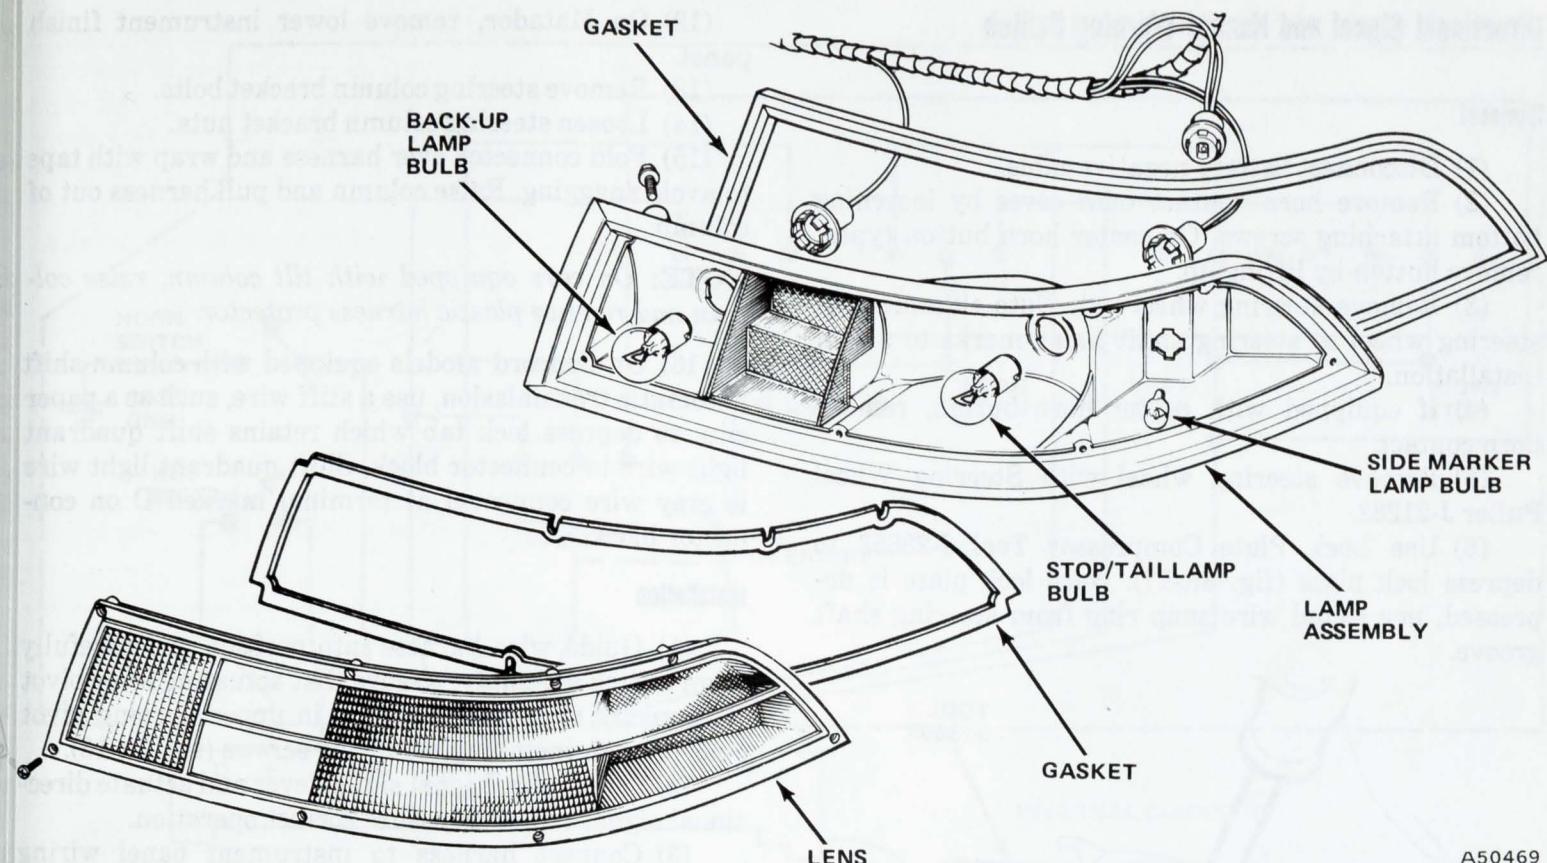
R-15 Rear Lamp Assembly—Pacer Hatchback
